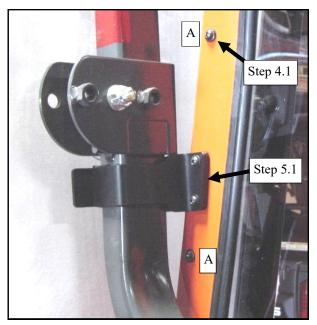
(View of left side of tractor) (Lower roll bar mount shown here)
